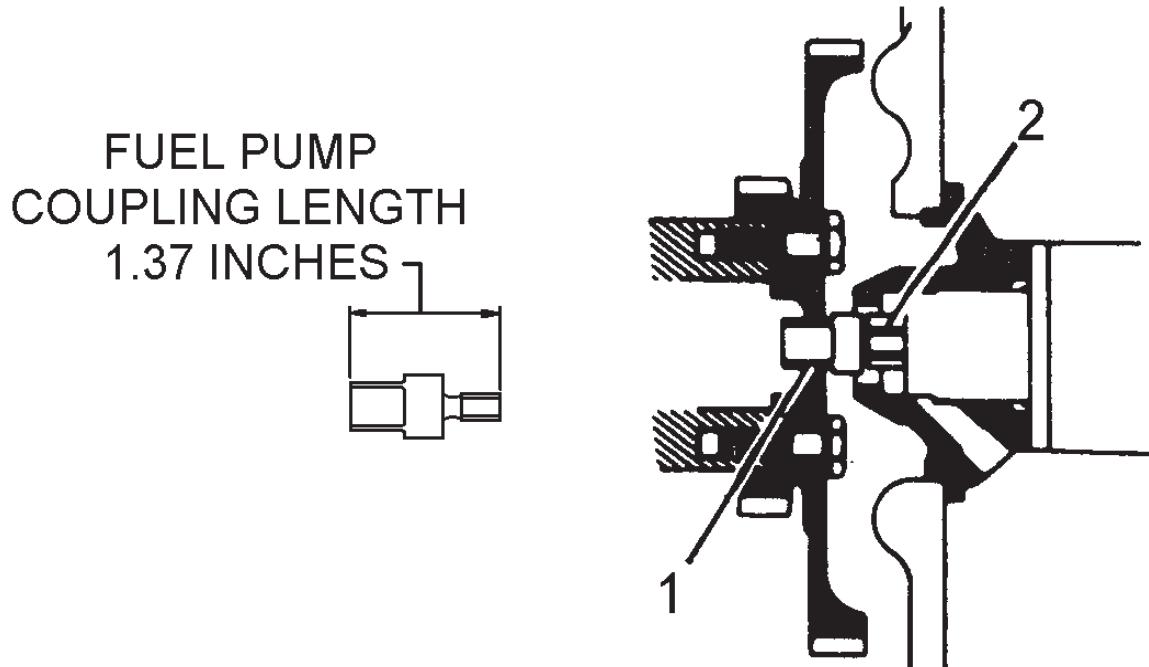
Fuel Pump Drive Coupling Fits & Limits
